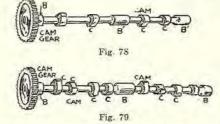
The cam shaft as used with a four-cylinder "T"-head type cylinder. There are two shafts, an intake cam shaft and an exhaust cam shaft—one on each side of the cylinder as shown in Fig. 80. There are four cams on each shaft. The noses of the cams are placed at different positions, so that the valves will be raised at a certain time. C are the cams. B are the bearings for the cam shaft.
